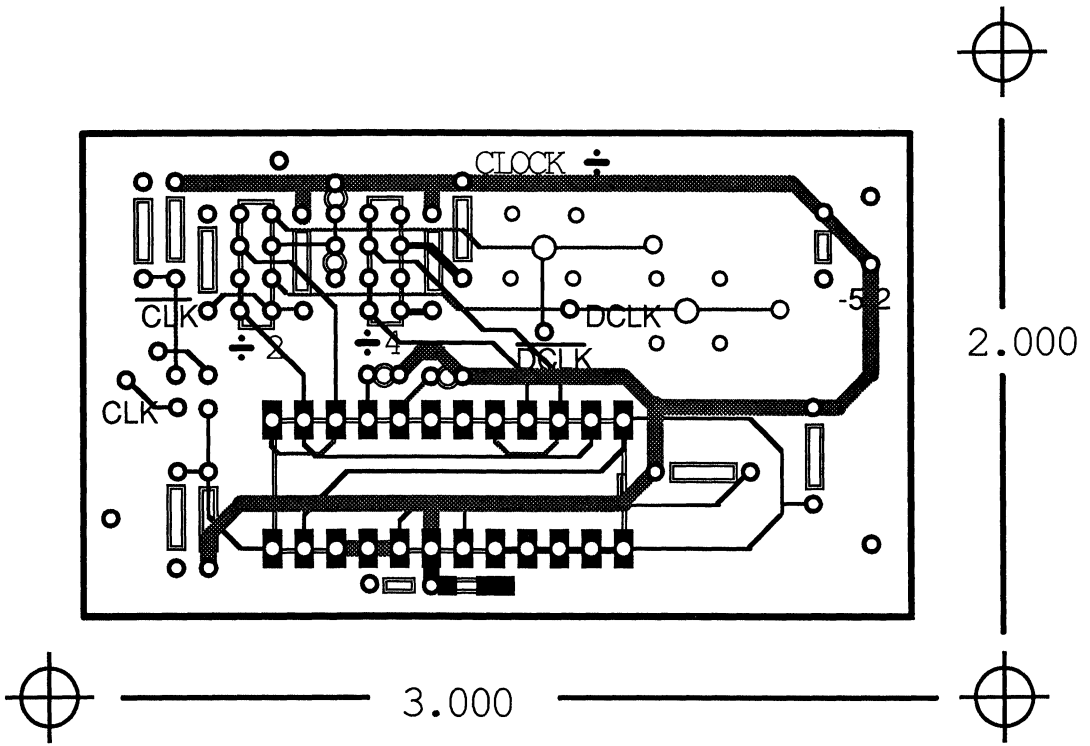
CLOCK DIVIDER BOARD LAYOUT AND COMPONENT POSITION
